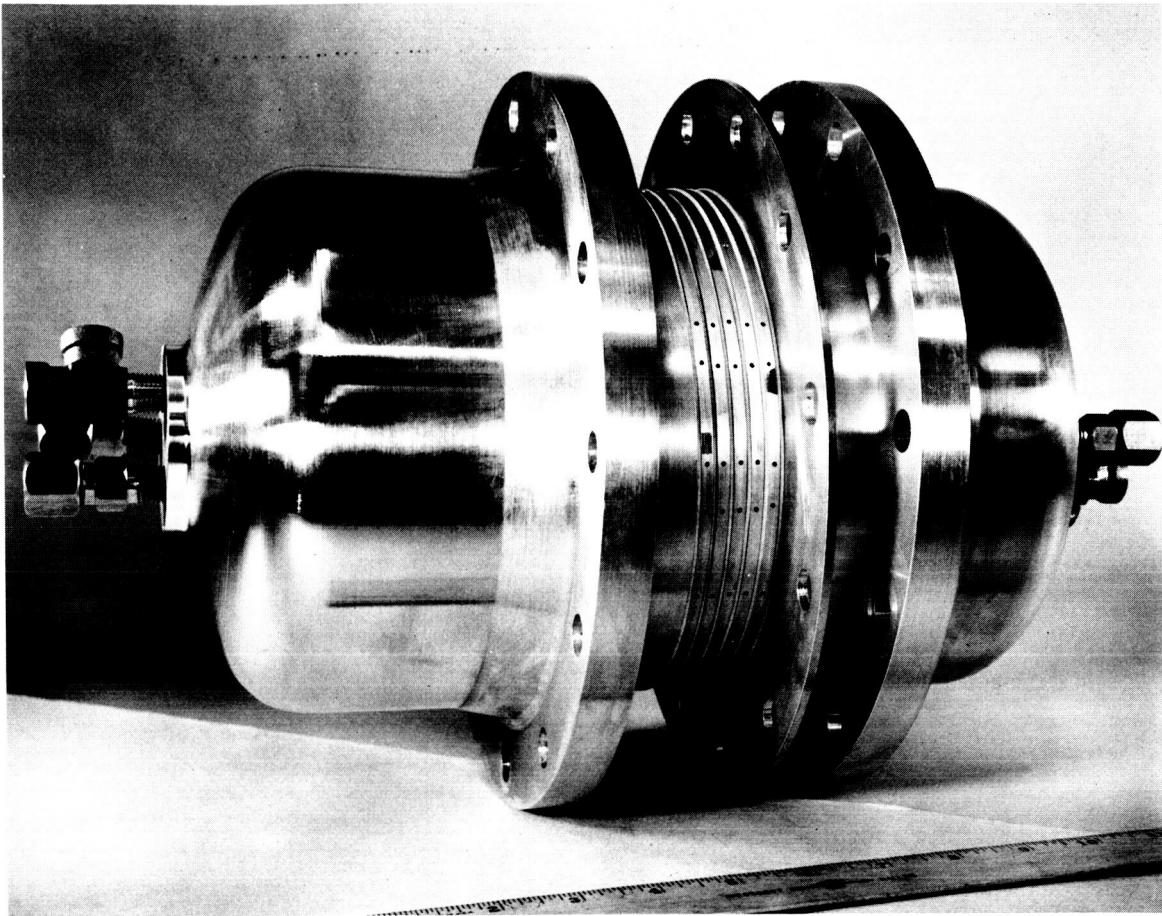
FUEL CELL ASSEMBLY PARTIALLY DISASSEMBLED
